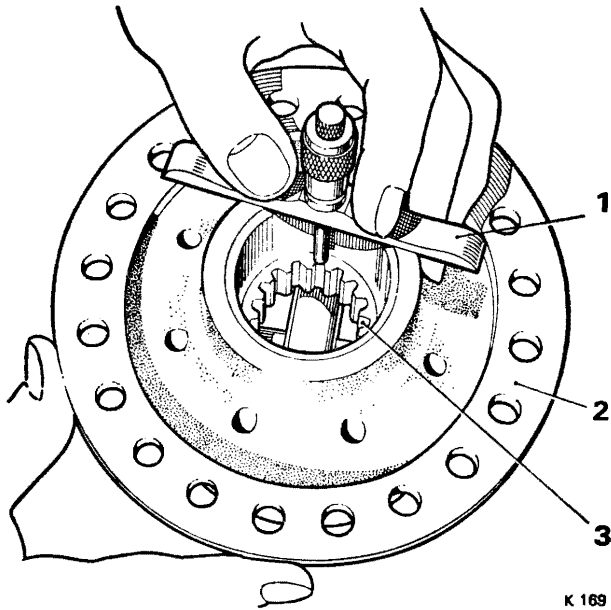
SPLINED BEVEL PINION MEASUREMENT
